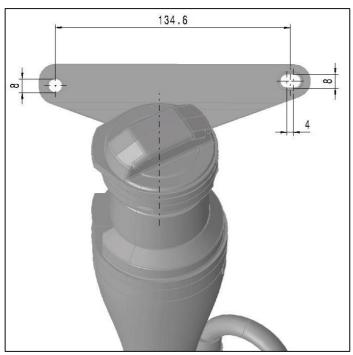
Fuel filler neck with standard attachment flange
